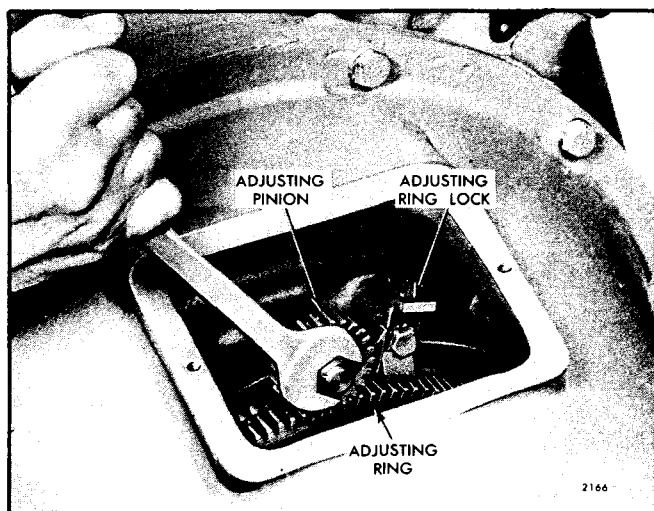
Power Take-Off Assembly Showing Method of Adjusting 18 Inch Diameter Clutch
